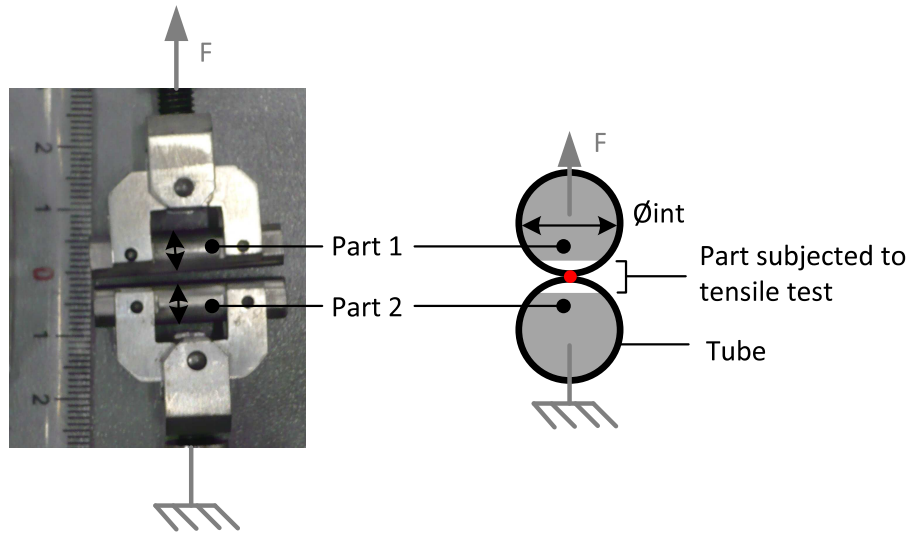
Developed device for tensile testing of strength of the line joint between joined tubes.
